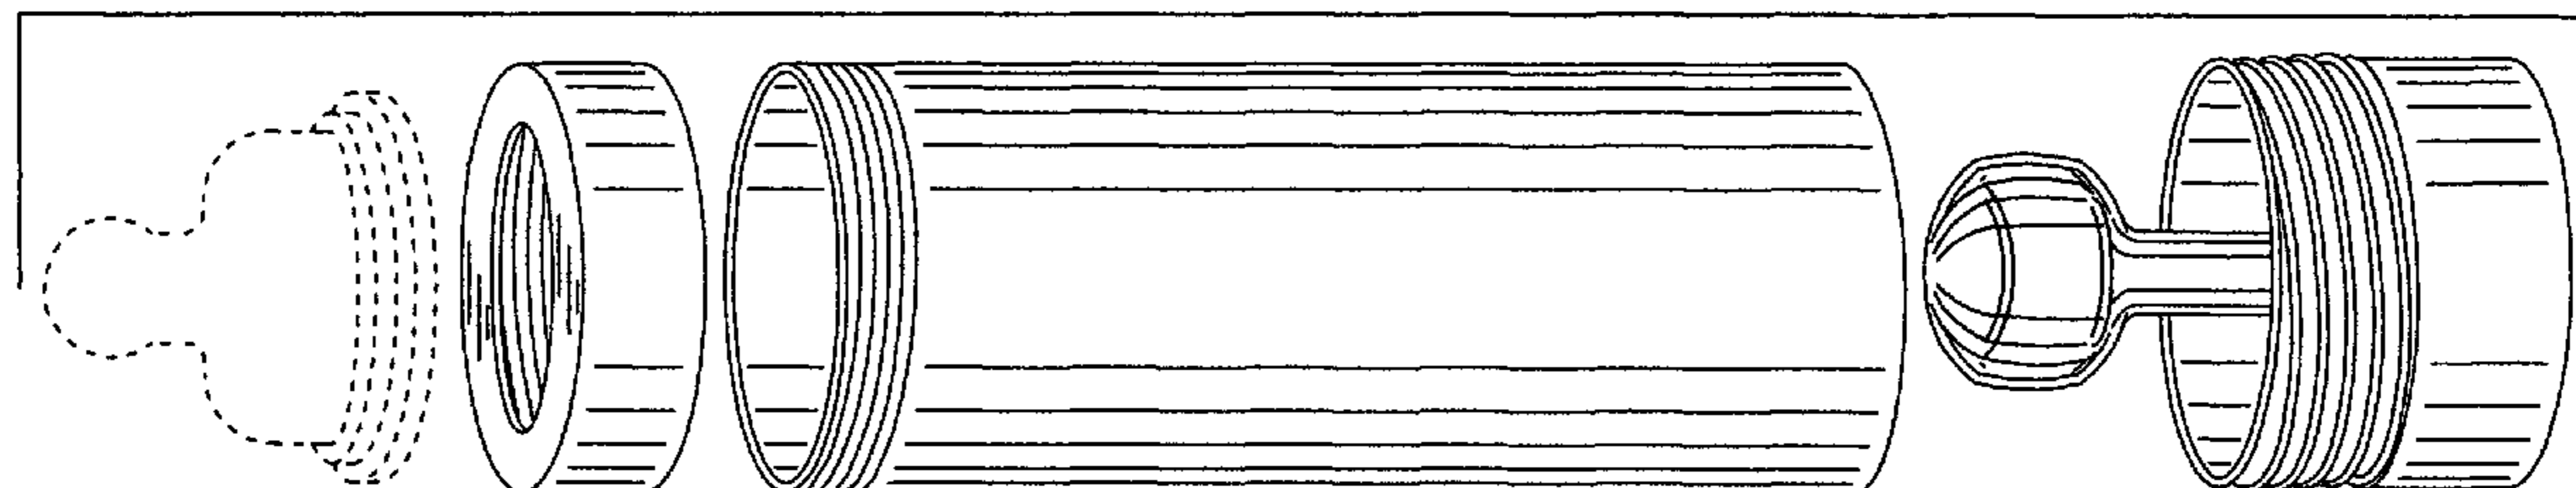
is an exploded side cross-sectional view taken along line 3—3 of FIG. 2.
